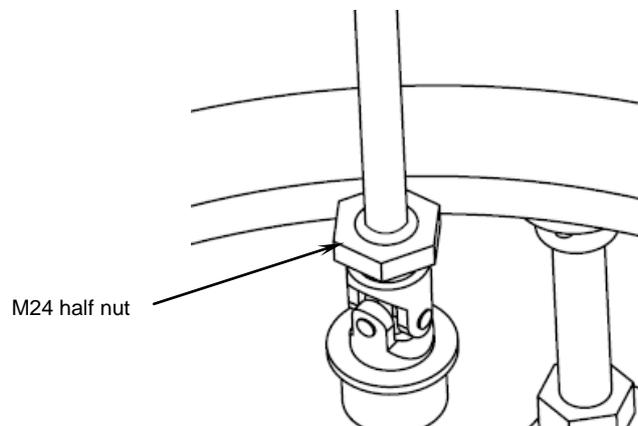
M24 nut used to secure disc/gyro assembly
